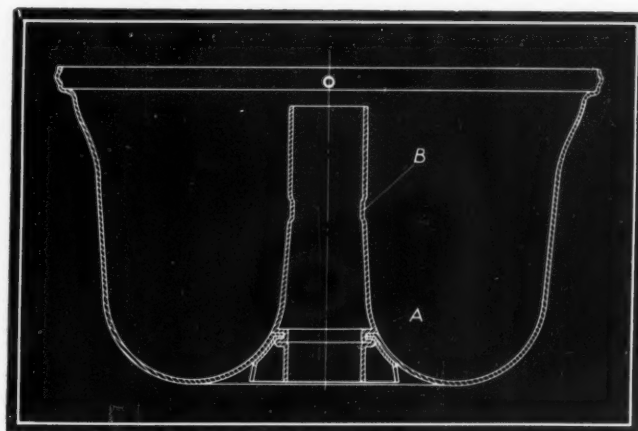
An assembly of an aluminum stamping and an aluminum tube is used to construct the bowl
